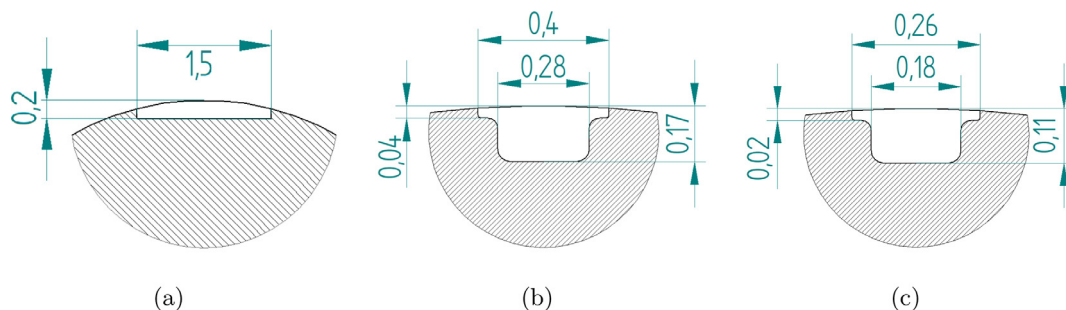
Drawings of the artificial defects introduced in the samples: (a) P1; (b) P2; (c) P3.
